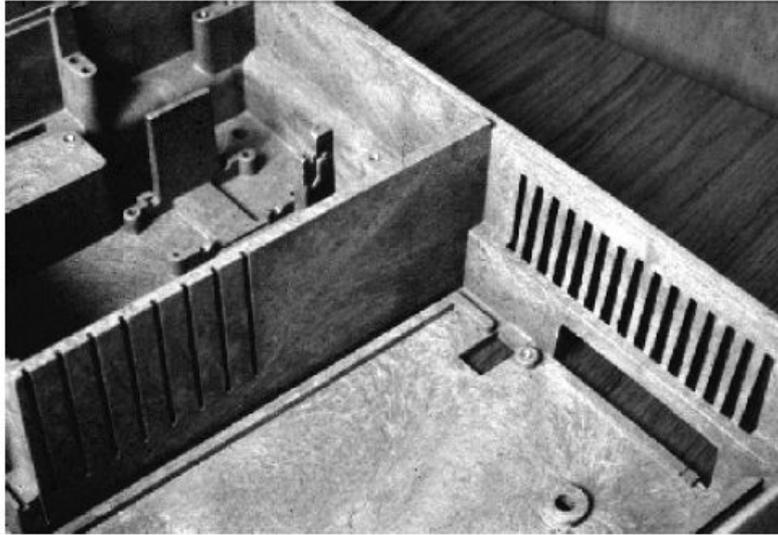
Low-pressure structural foam louvers and weld line.
